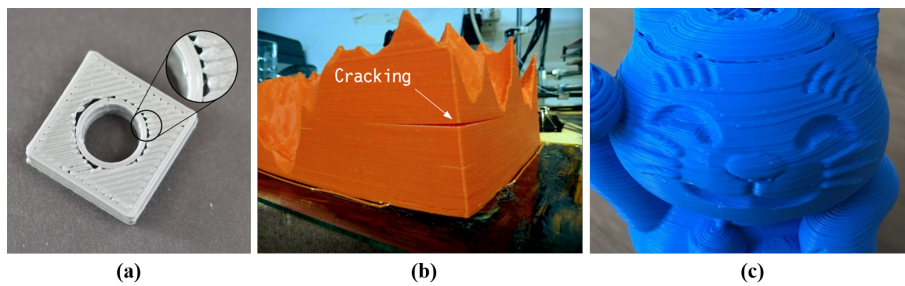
Cracking modes: (a) surface defects [17], (b) shell defects [18], and (c) delamination [19]
